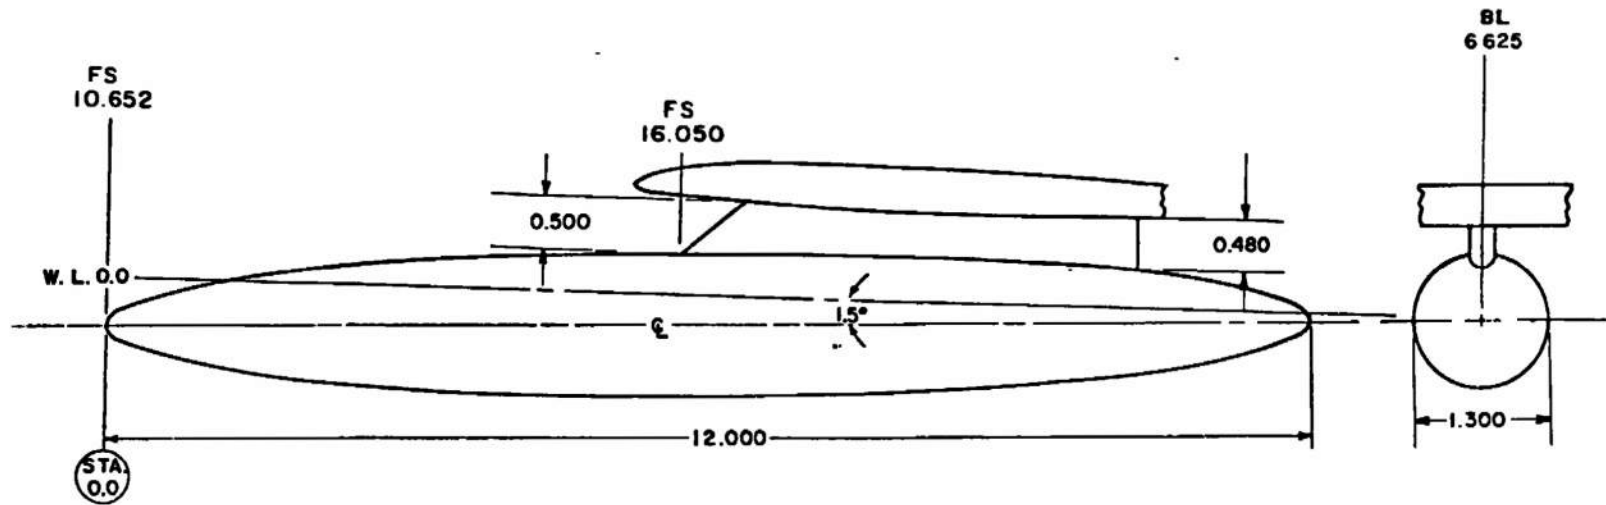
Dimensional Sketch of the Outboard and Inboard Pylons
